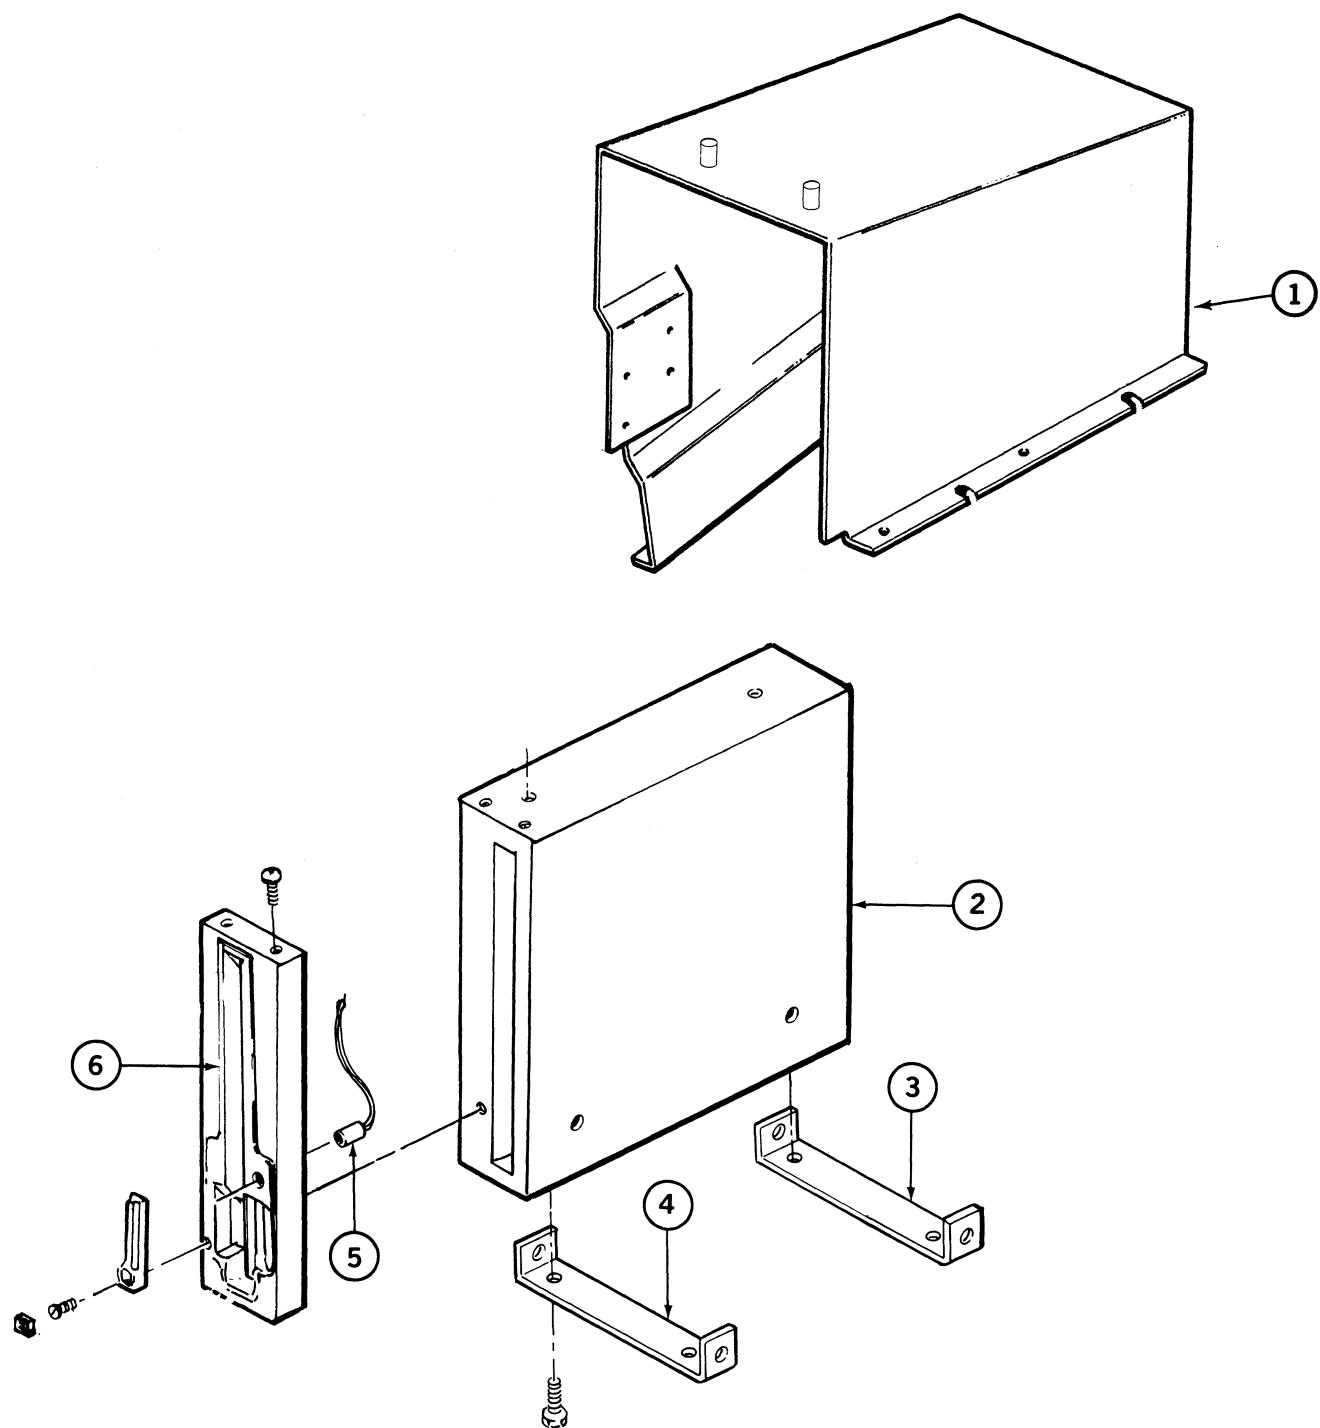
Exploded View, Floppy Disk Drive Assembly
